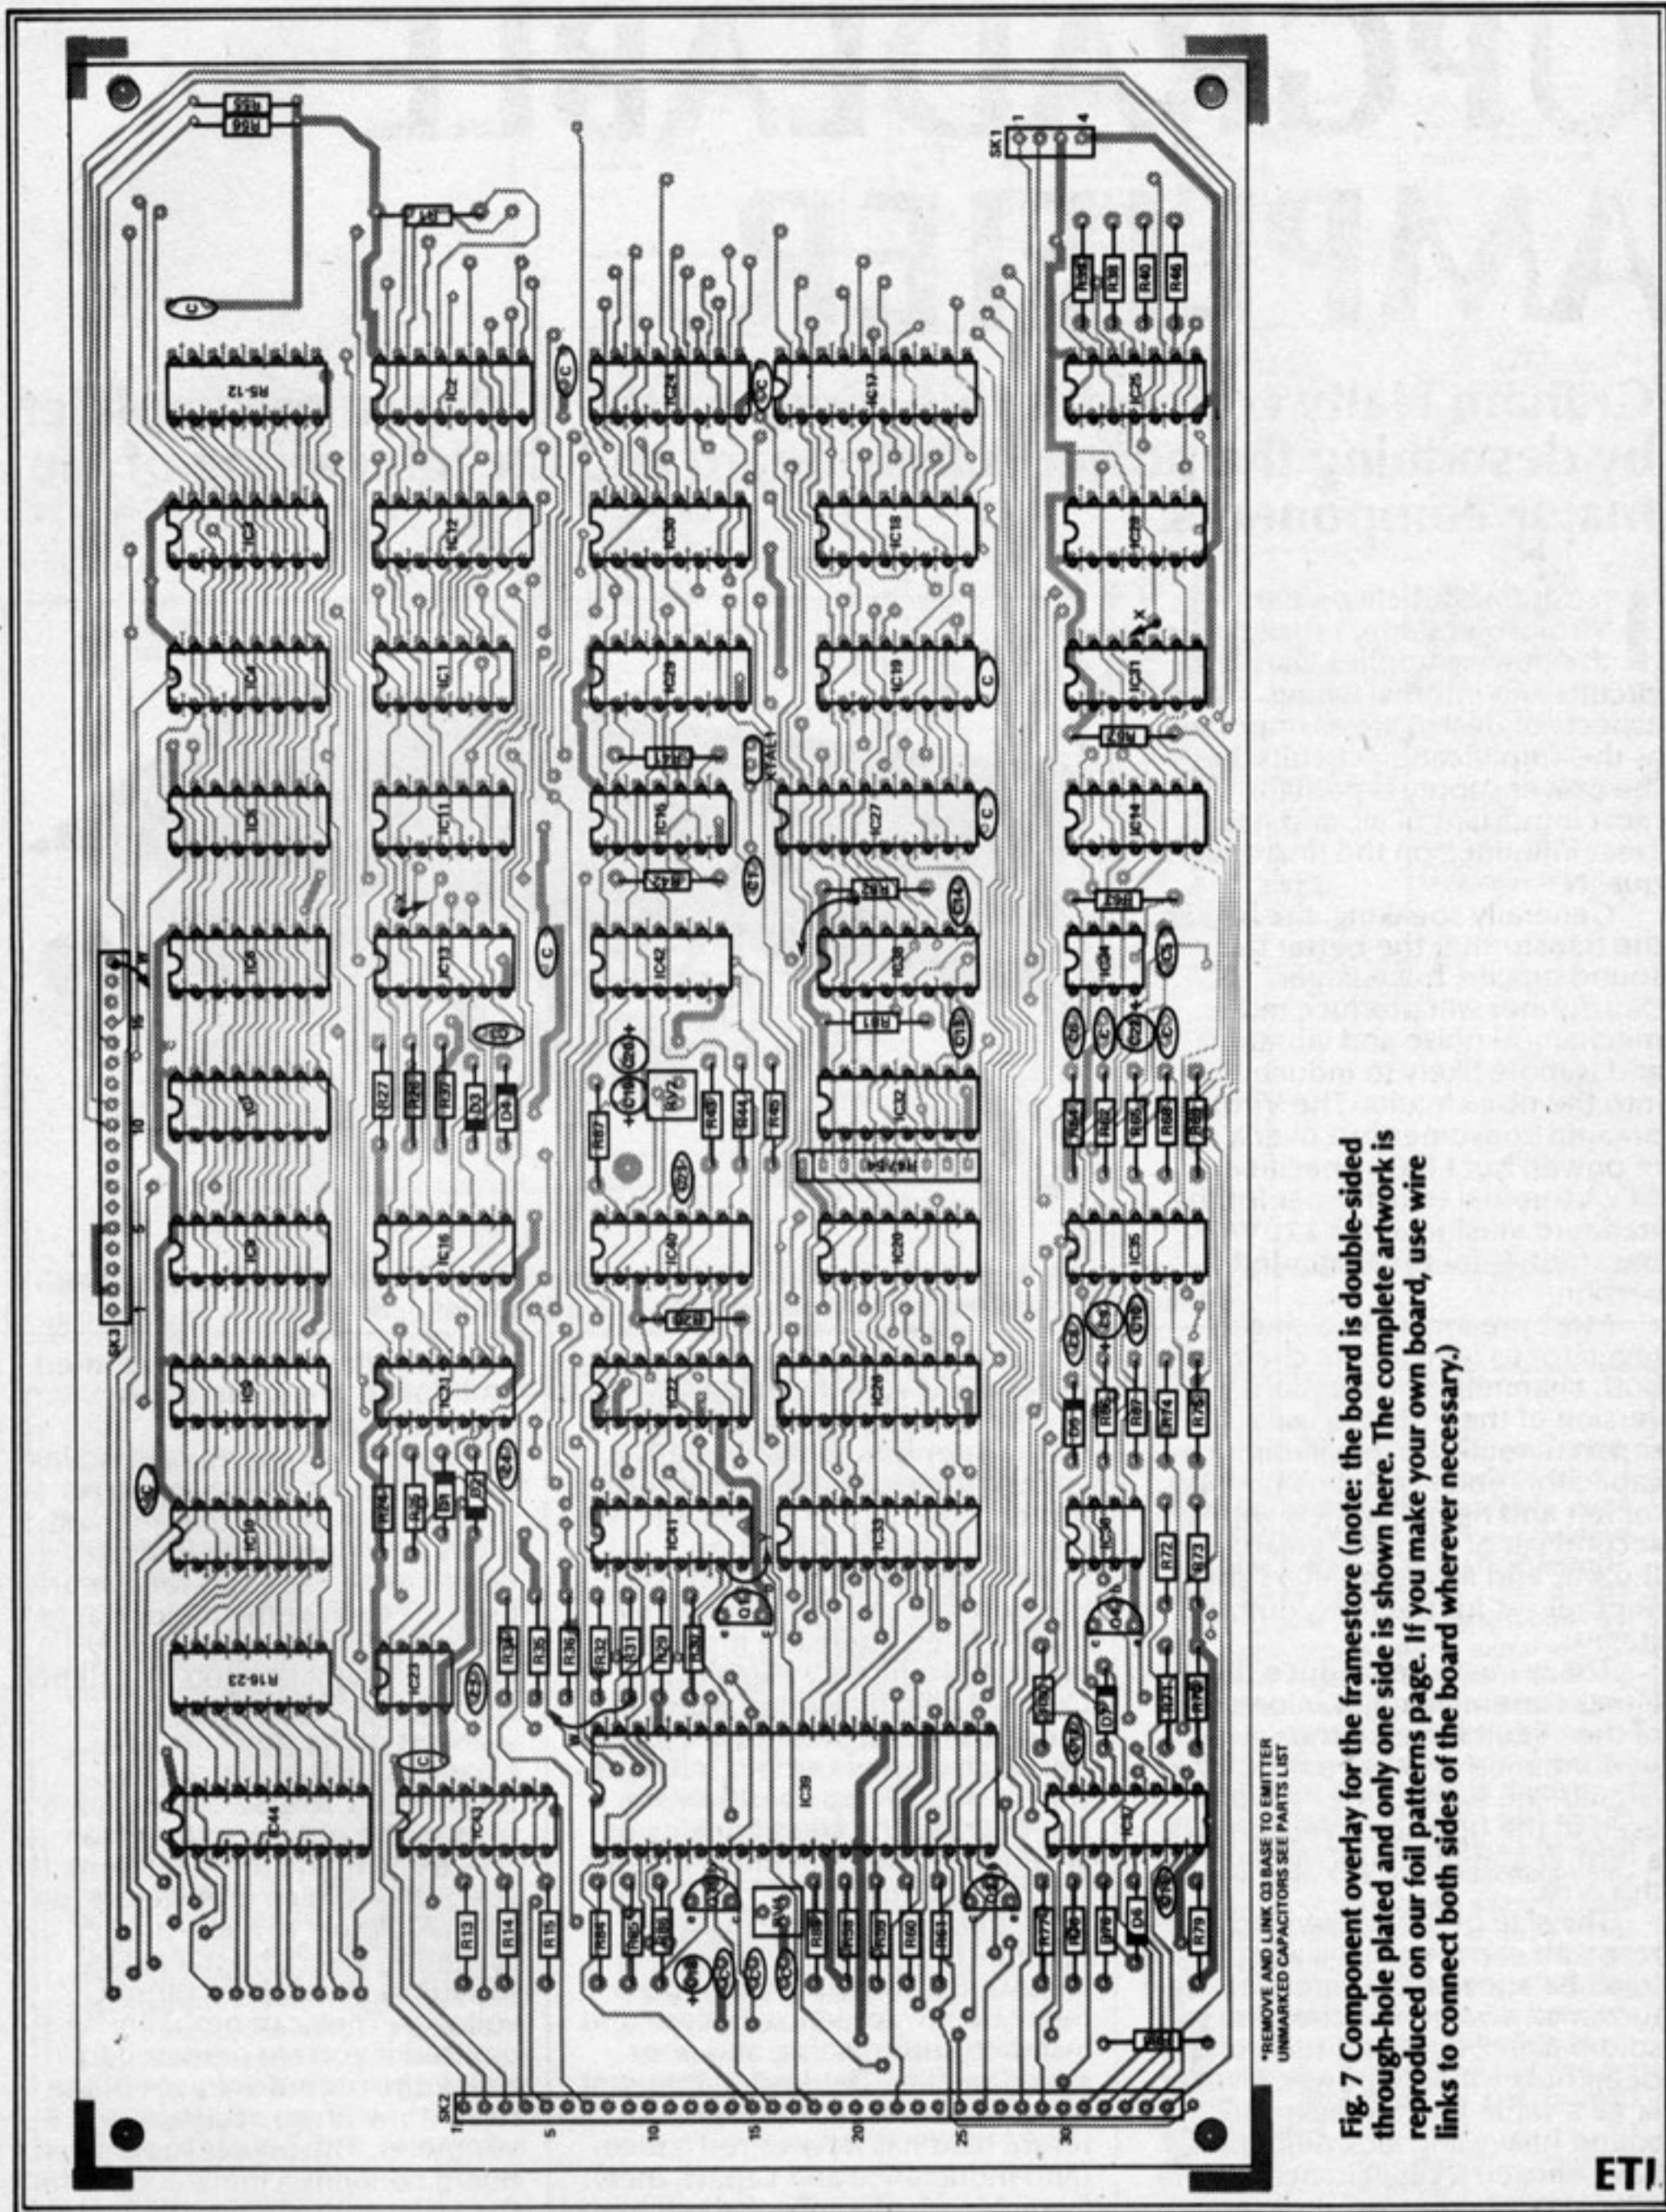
Component overlay for the framestore (note: the board is double-sided through-hole plated and only one side is shown here. The complete artwork is reproduced on our foil patterns page. If you make your own board, use wire links to connect both sides of the board wherever necessary.)
